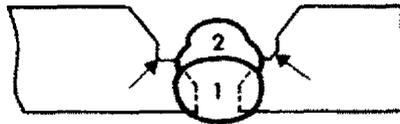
Bead with high crown and lack of edge fusion caused by welding with a short arc.
